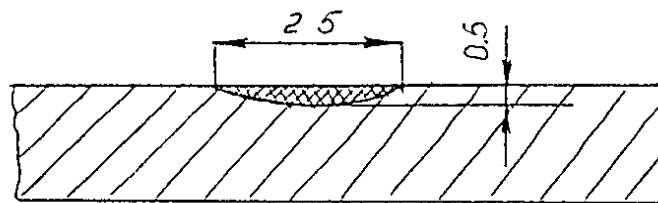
Recommended Sizes of Initial Manufacturing Defects for Fillets Surface Crack
